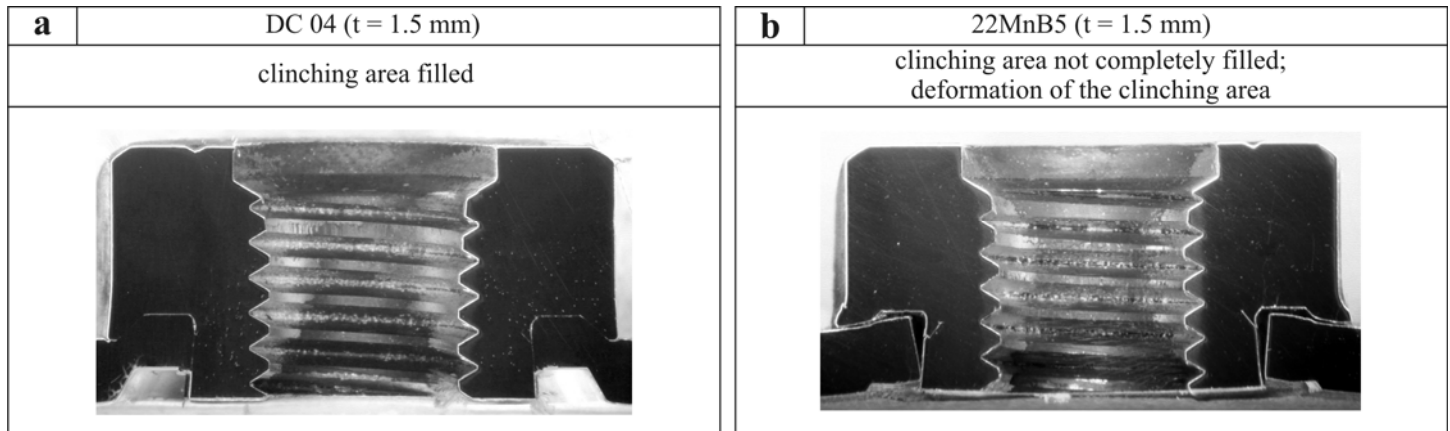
Examples for self piercing nut - sheet metal connections; left: soft metal sheet (DC04), right: high strength sheet metal (22MnB5)
